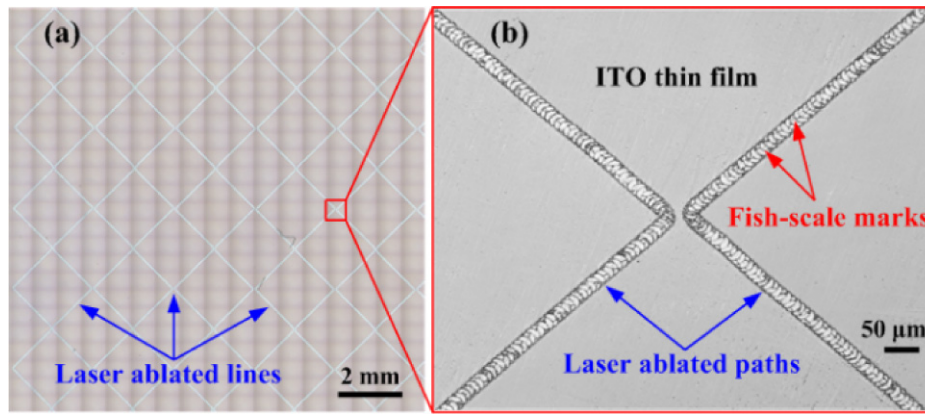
(Color online) Photographs of (a) the stitching electrode assembled by 391 pieces of assembled blocks and (b) enlarged a partial electrode.
